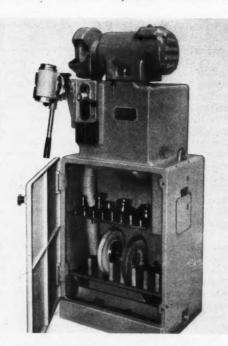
This Burrows & Smith D-Burr machine can be employed for de-burring and chamfering the teeth on a wide variety of gears up to a maximum diameter of 12 in.
